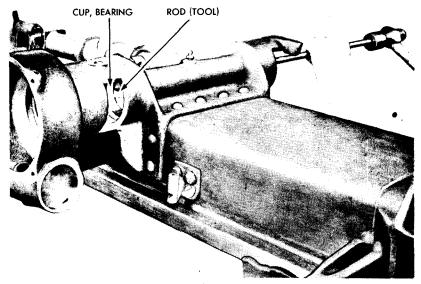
Removing Bushing From Worm and Worm Wheel Housing
